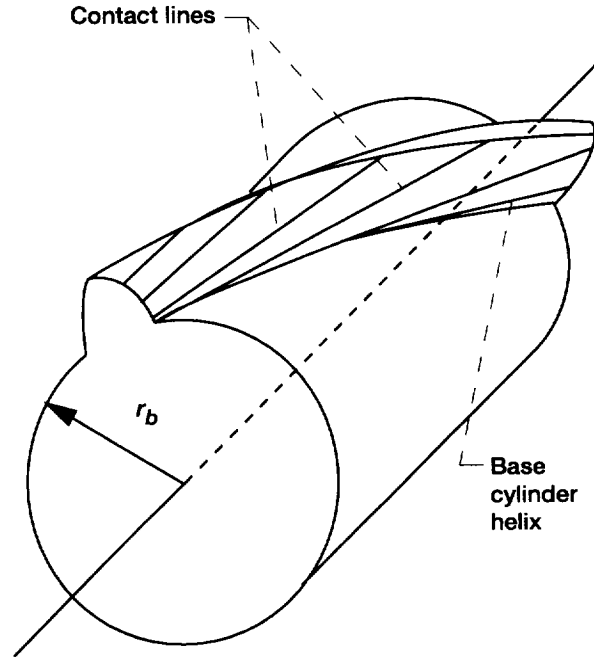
Contact lines on tooth surfaces of a helical gear.
